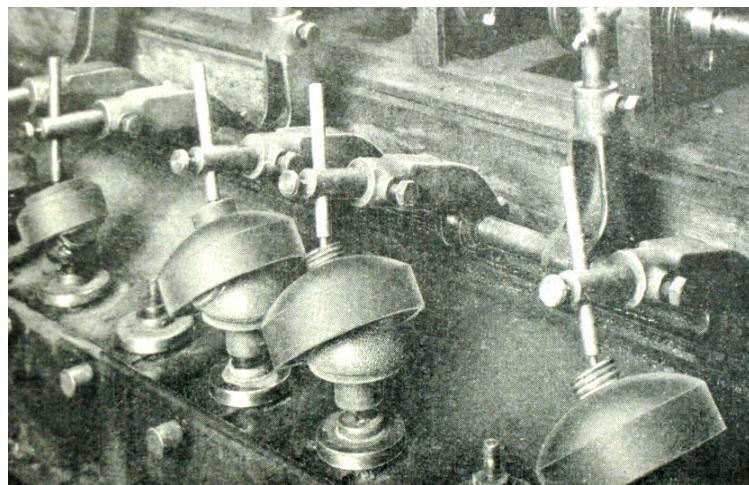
A bank of lens grinding machines at Adam Hilger Ltd.
